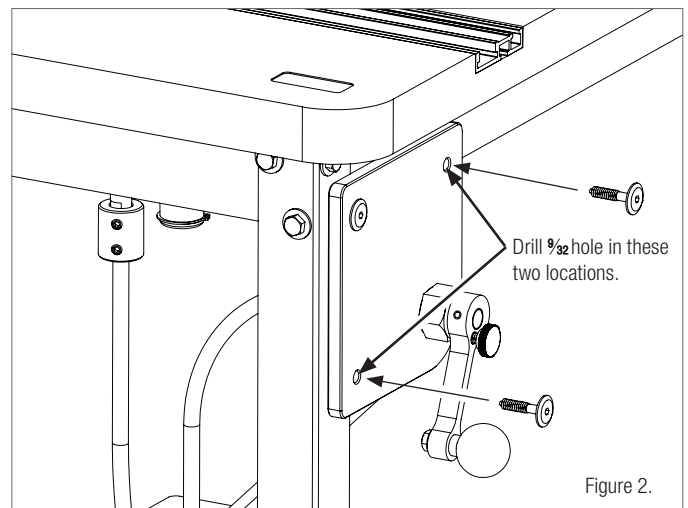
Using the side panel as a guide, drill two 1/32 dia. holes through the router table stand. Fasten the panel in place using the remaining connector bolts and nuts.
